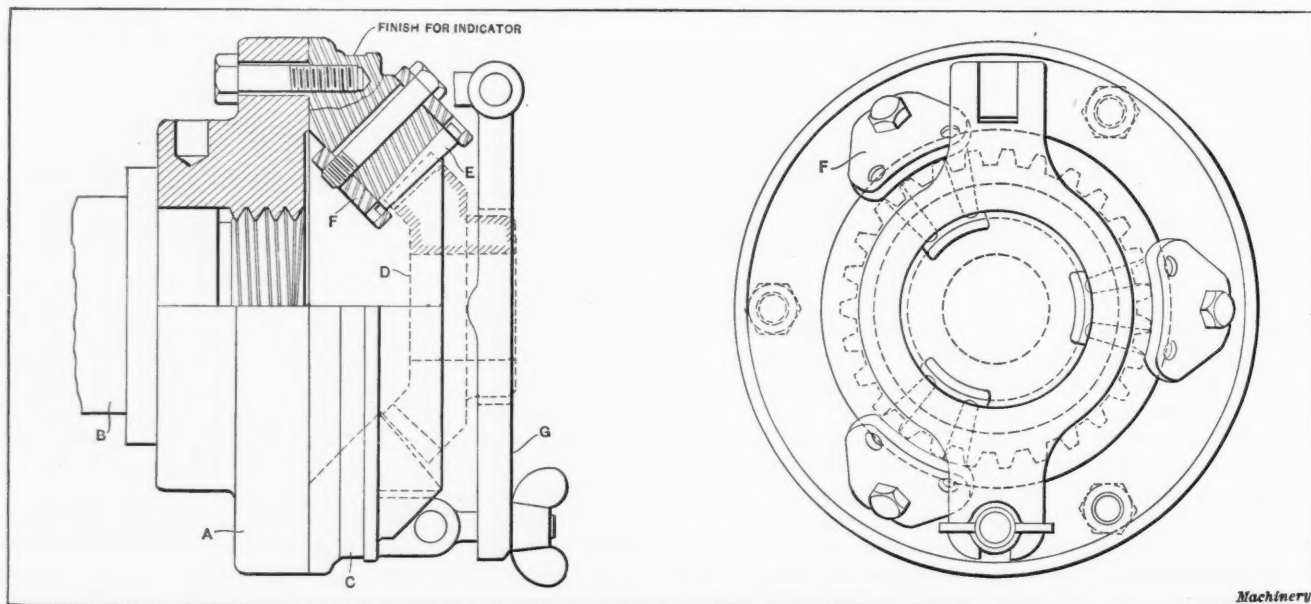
Bevel Gear Chuck with Tapering Rolls which bear against Sides of Teeth
